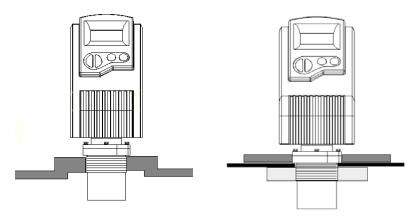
Threaded Flange/Thread-Free Flange Mounting
